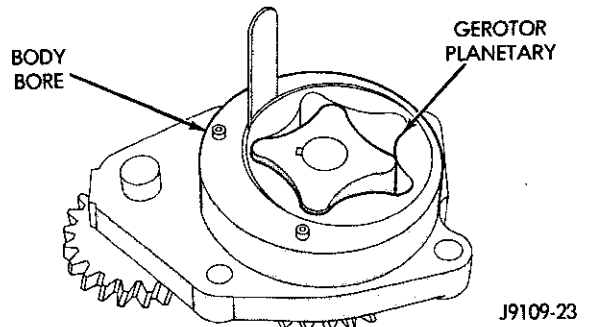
Measuring Gerotor Planetary to Body Bore Clearance
